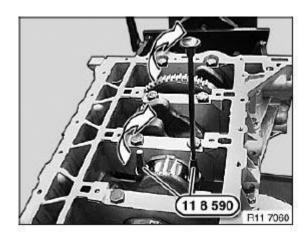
Identifying Special Tool (11 8 590) Into Conrod Big Courtesy of BMW OF NORTH AMERICA, INC.
